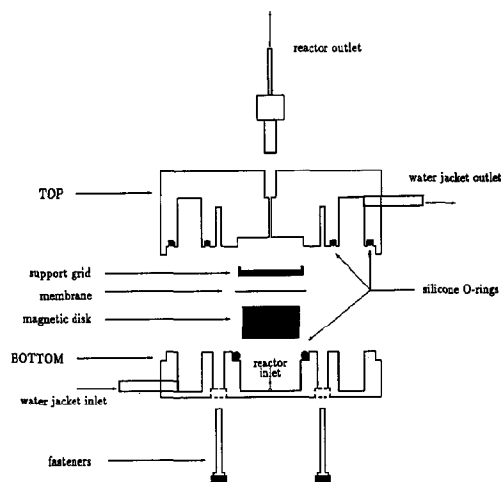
Cross-section of (A) in Fig. 1: UCSTR reactor in exploded side view. Reactor outer diameter is 3 inch. Diameter of reactor chamber is 0.880 inch; depth of reactor well from bottom of O-ring seating is 0.325 in. A 0.030 inch deep well is cut into top surface of membrane support grid. Other dimensions: membrane support grid diameter is 0.888 in, magnetic stirrer is 0.842 in in diameter and 0.316 in in height, water jacket silicone(S-0604) O-rings are sizes 2–031,2–038 (Parker Seals), reactor O-ring is size 2-119. Four fasteners are threaded into metal inserts in the reactor top to seal the reactor by compression. The reactor's inlet holes (size No. 56), through which 1/16 inch outer diameter tubing is forced and cut off flush to the bottom of the inner reactor wall, were drilled through both the outer and inner walls. The reactor outlet connector is an Upchurch Scientific flangeless fitting for 1/16 inch tubing (1/4–28 thread). Measured volume of reactor chamber once the UCSTR is fully assembled is 1.67 ml.
